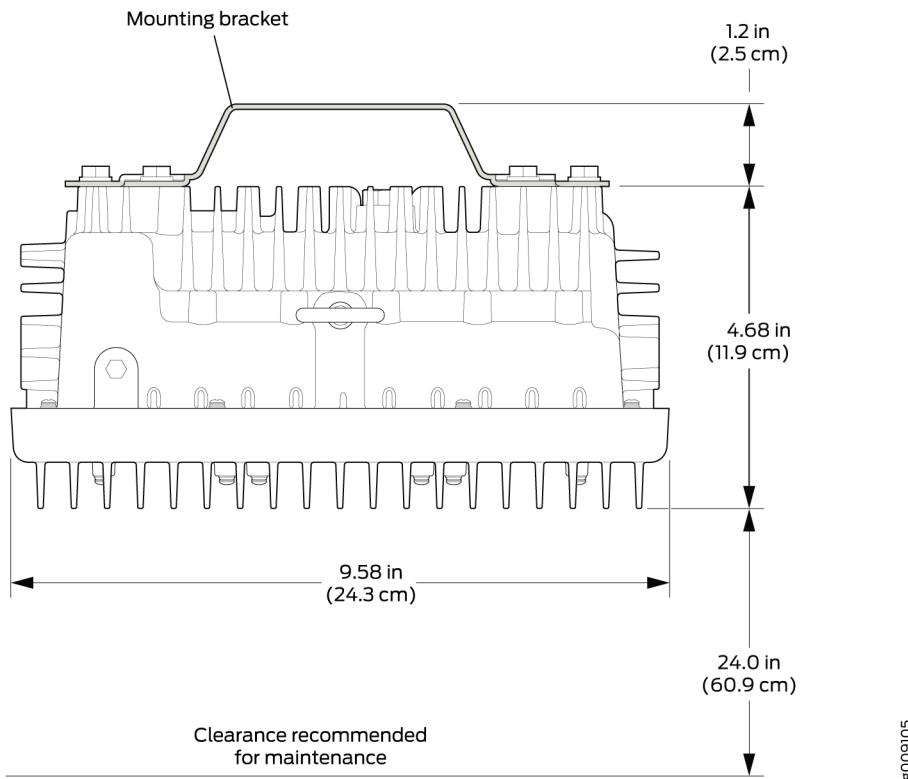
ACX500 Outdoor Router with PoE Chassis Dimensions and Clearance Requirements—Top View
